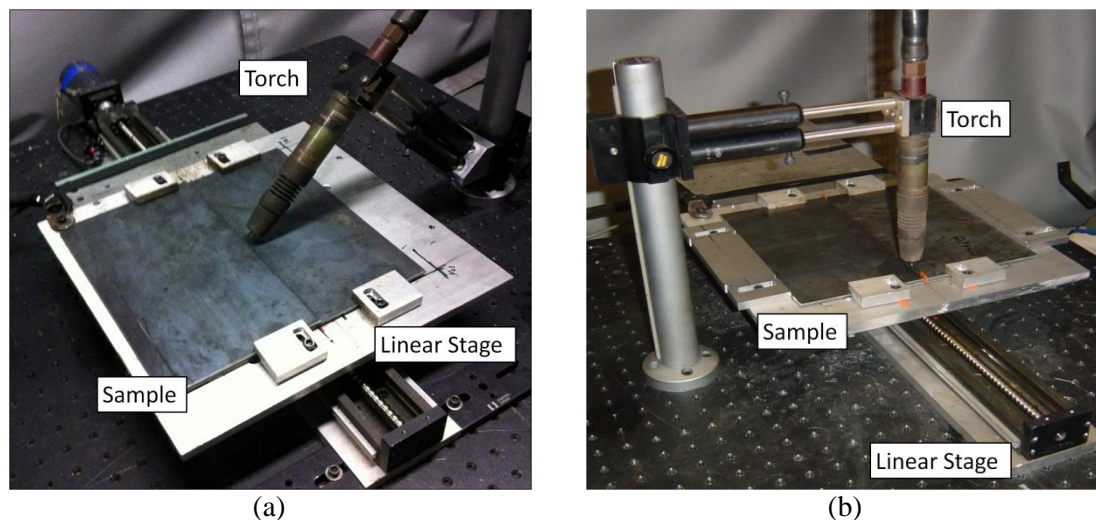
Photos of the welding setup for (a) Lap joint (b) Butt joint welding
